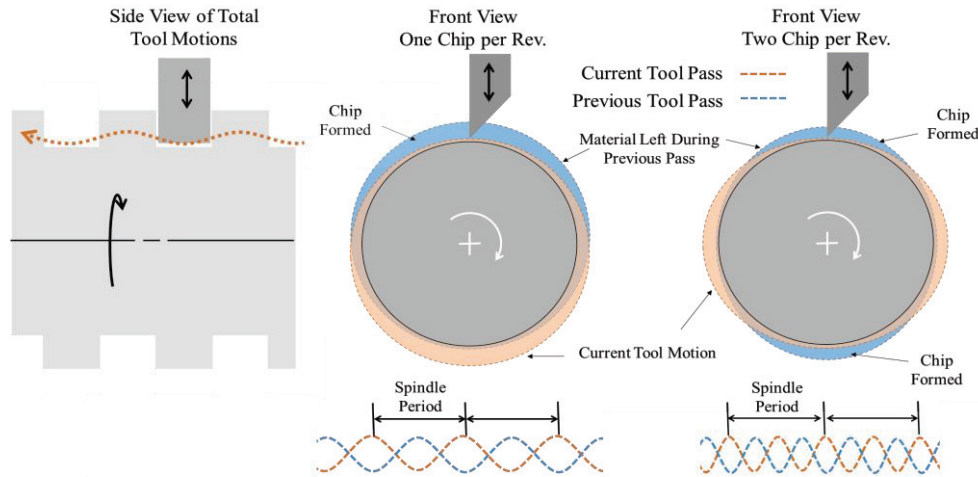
Illustration of MTP process for threading operations, where the tool repeatedly engages and disengages a wavy surface created during the previous tool pass.
